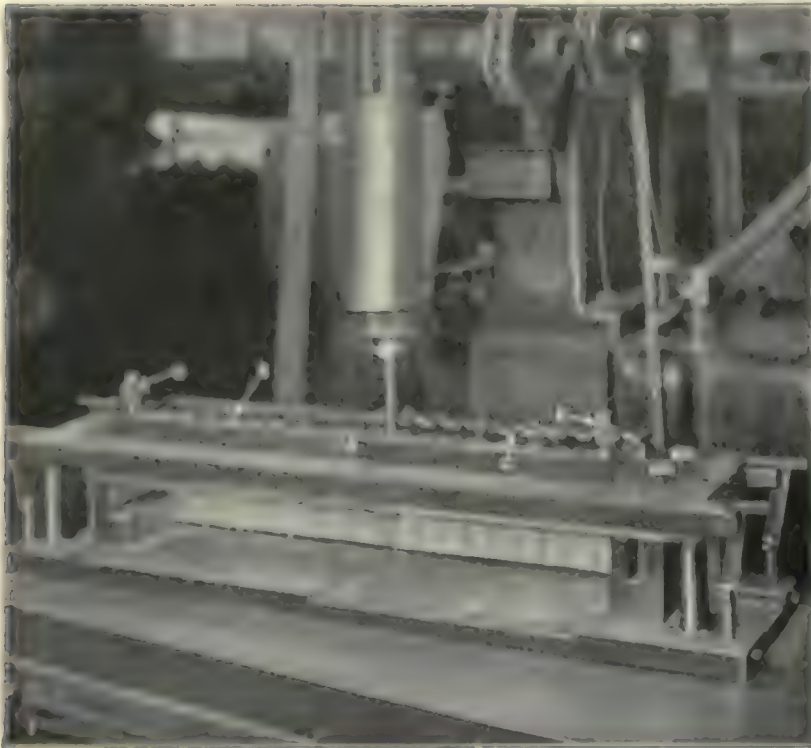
MILLING WINDOWS IN COVER. FIG. 2—DRILLING THE END HOLES
